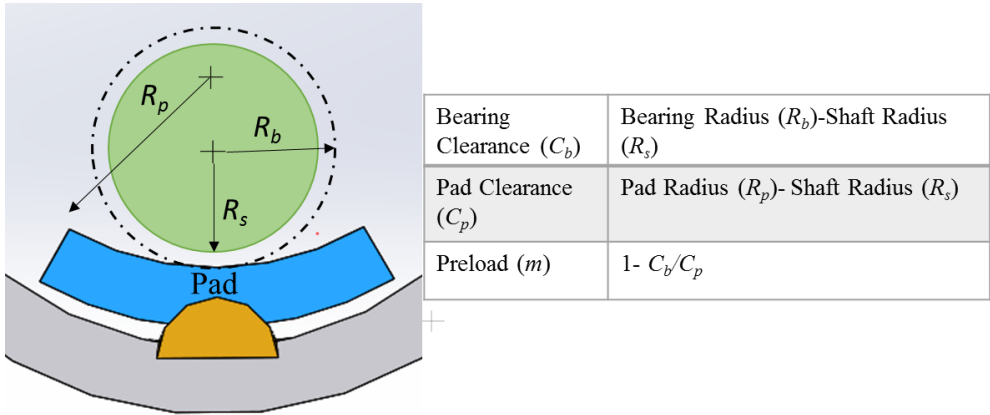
Schematic view of tilting pad and rotor defining bearing clearance (C_b), pad clearance (C_p) and bearing preload (m).
